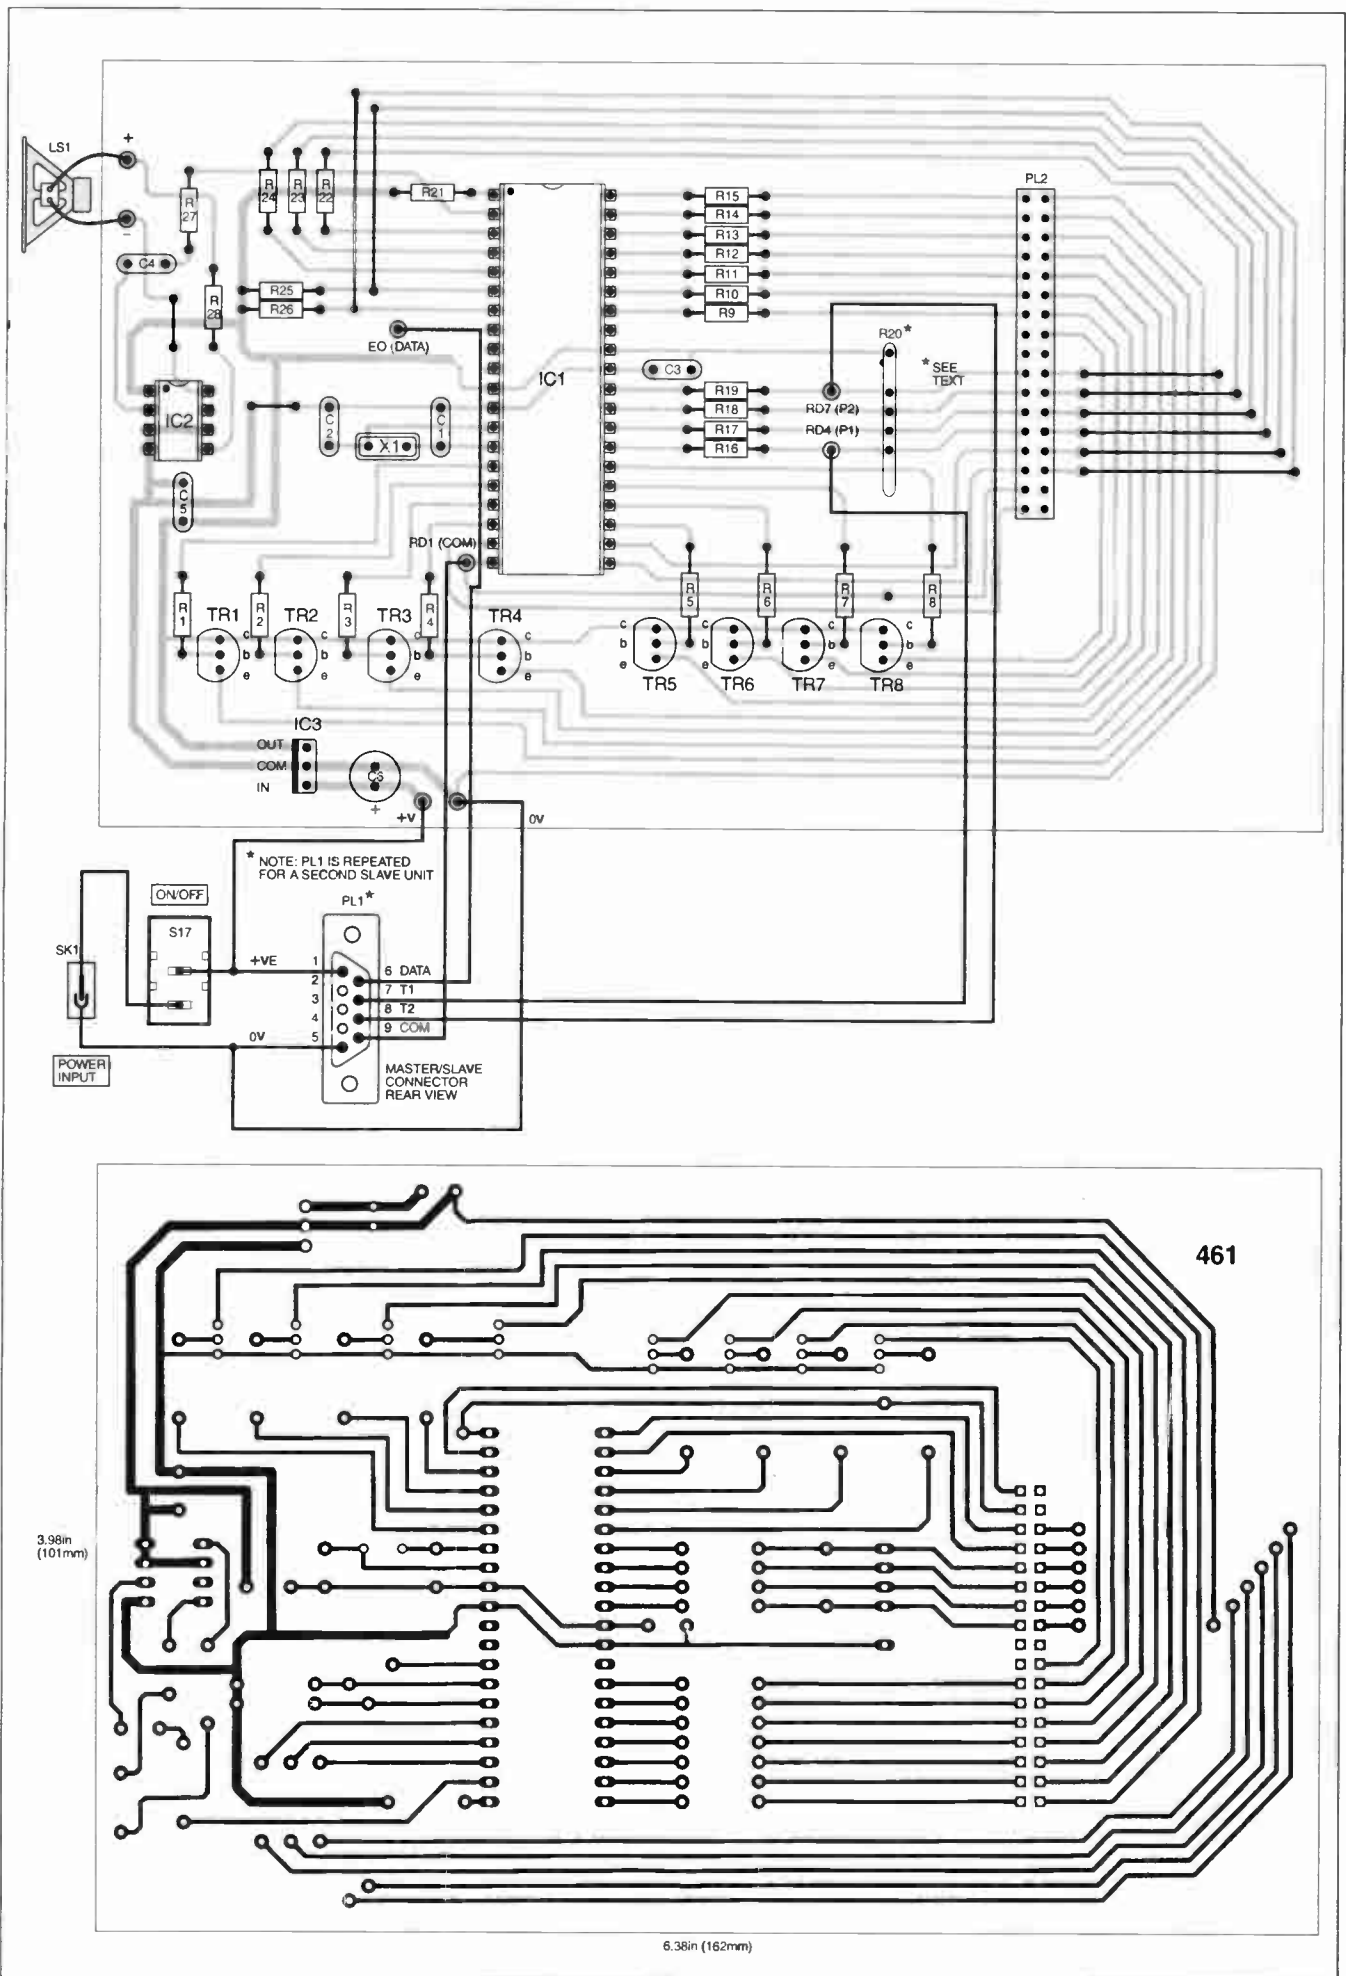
Control printed circuit board component layout, full-size copper foil master and wiring to off-board components.
